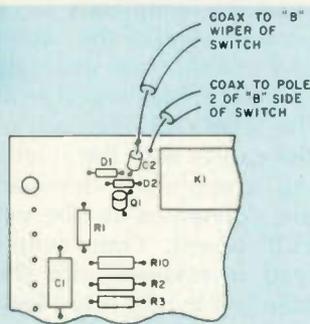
Corner of top side of control board showing location of C2 and coax cable connections.
